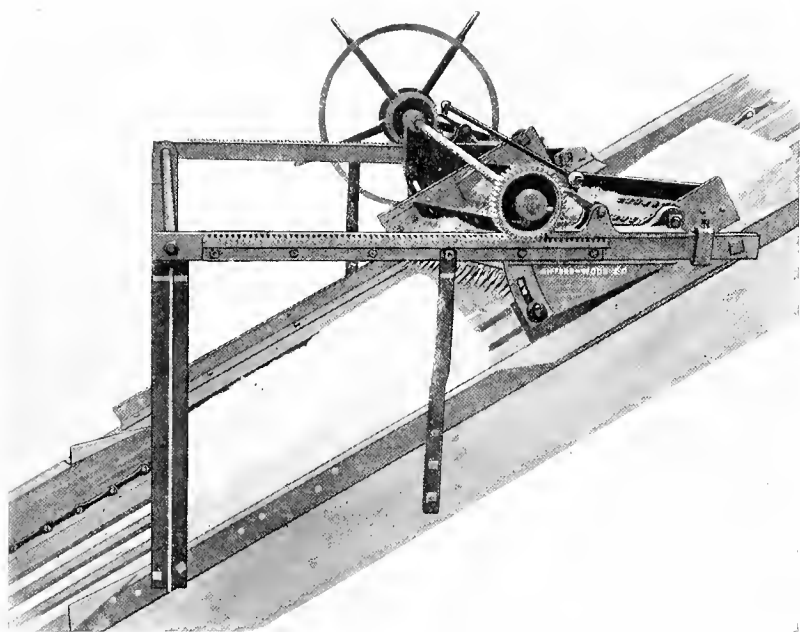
Eureka Elevator Planer, Movable Carriage Style, No. 252.
